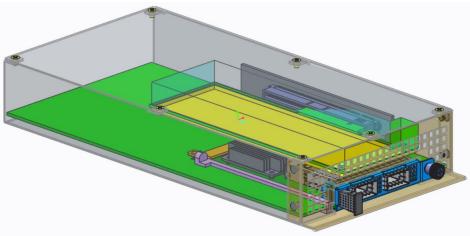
Small Card Thermal Test Fixture Preliminary Design – Transparent View
